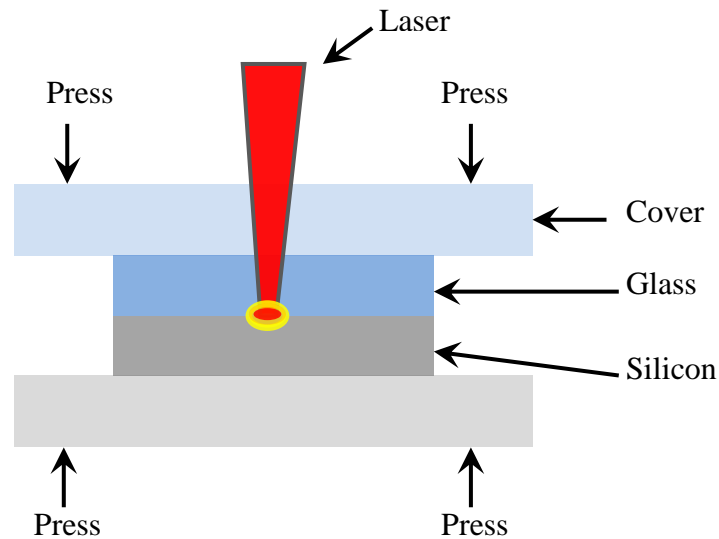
Schematic of the laser welding glass to silicon.
